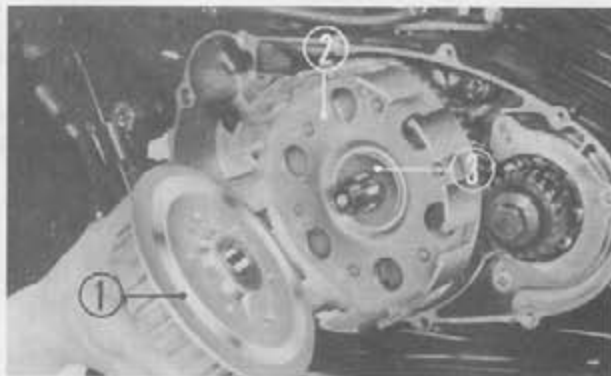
① Clutch center ③ 22mm thrust washer
